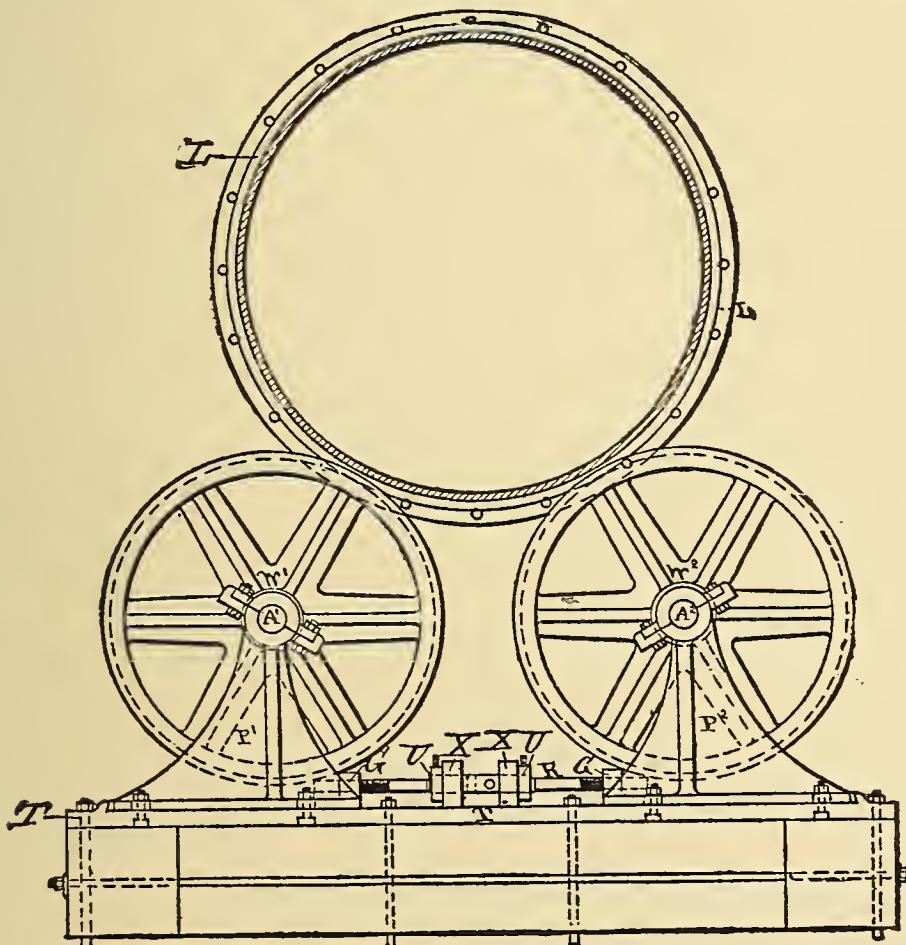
BOWERS FURNACE. Sectional Elevation showing how the Furnace is supported.
